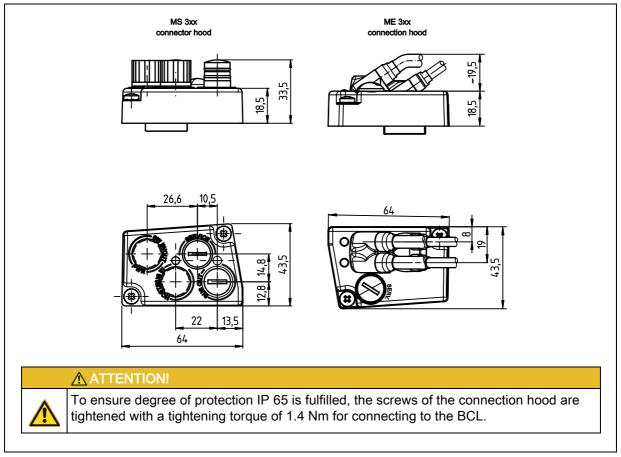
Dimensioned drawing of MS 3xx connector hood / ME 3xx connection hood
